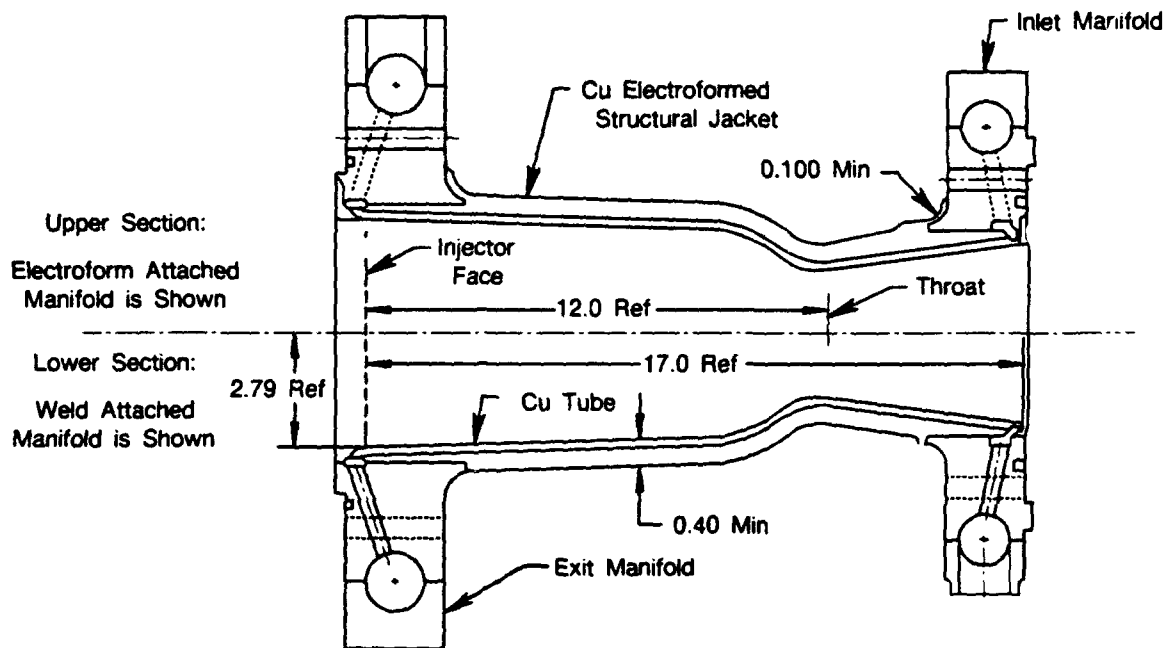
Advanced Expander Test Bed Copper Tubular Combustion Chamber
